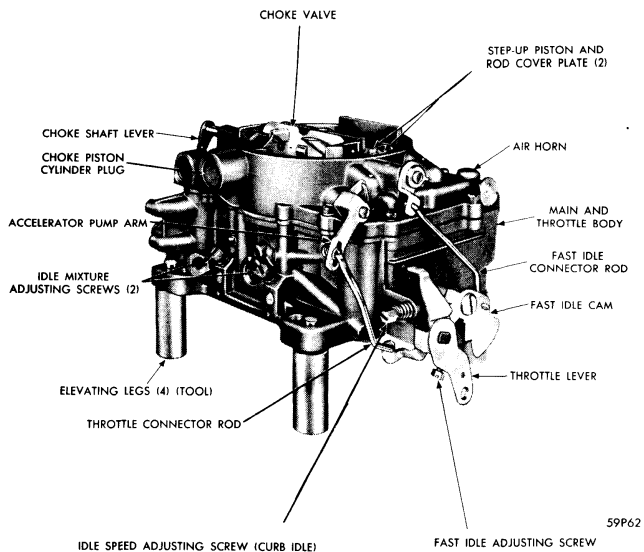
Four-barrel carburetor—Model AFB (Carter)—left front view
